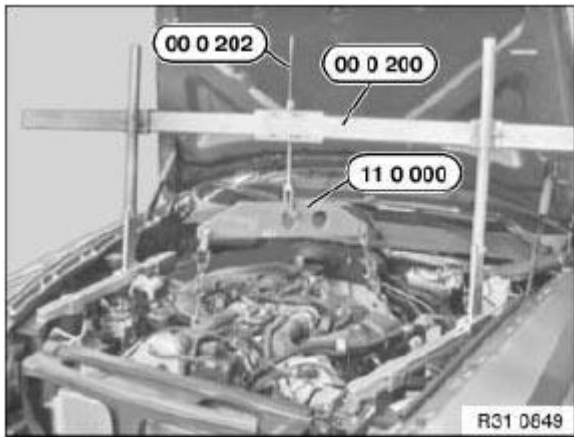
Attaching Suitable Chains To Special Tool And Suspend From Both Engine Suspension Eyelets
